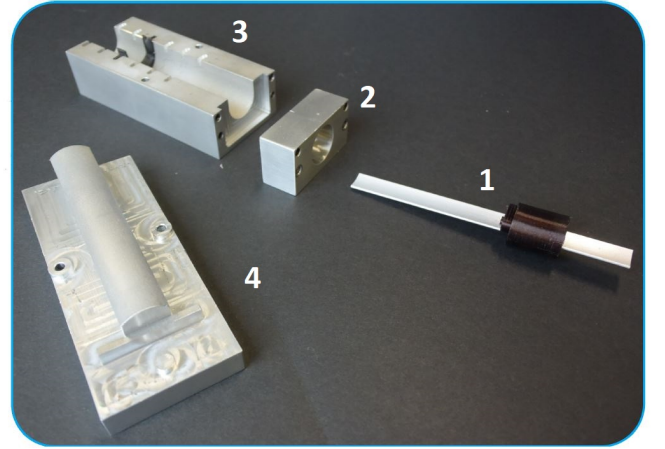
Disassembled mold, consisting of half-moon rod with holder (1), rod holder fit (2) and half-moon negative profile (3) of the bottom mold, and the top mold (4).
